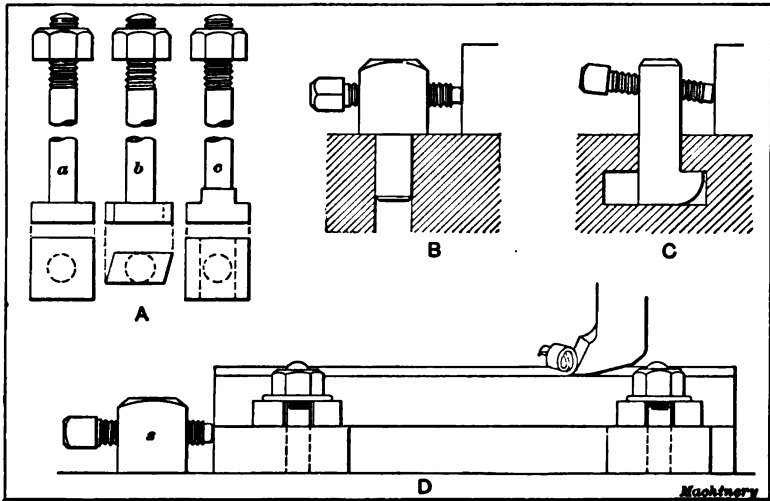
Planer Clamping Bolts—Stop-pins—Use of Stop-pins
